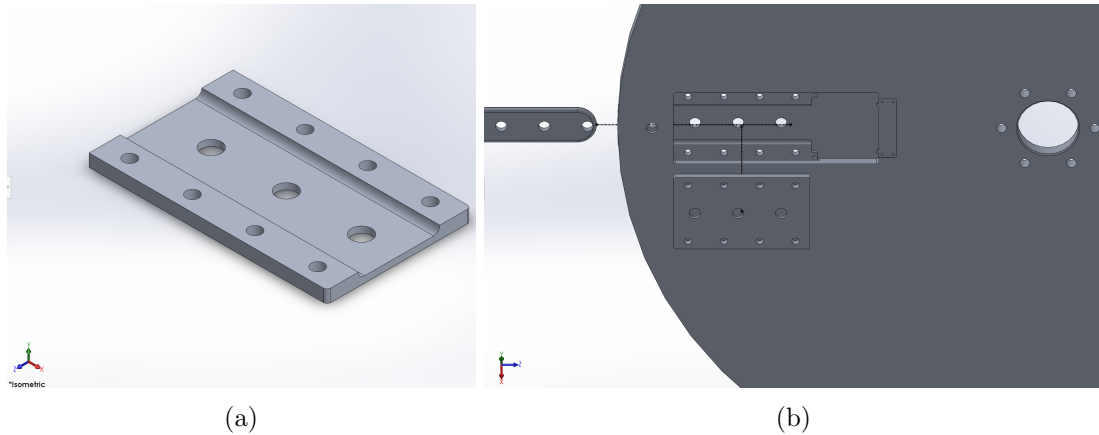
Figure 6.8a shows the CAD model of the Plate Cover component. Figure 6.8b shows the assembly of the Plate Cover, Sample Holder and Plate.
